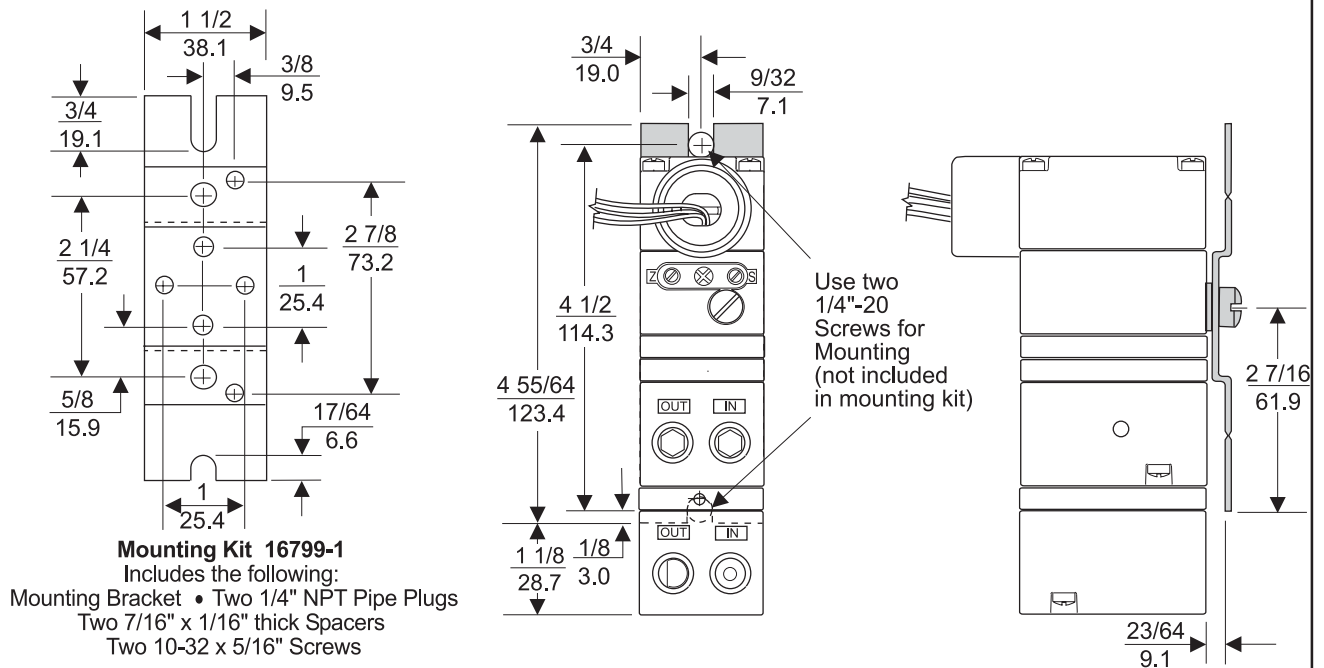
Mounting Kit 16799-1. (Included with Unit)
